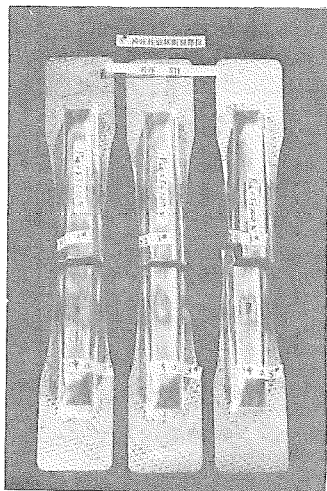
Failure Fractures of 3 STF Specimens (Depth/Width=0.72)
